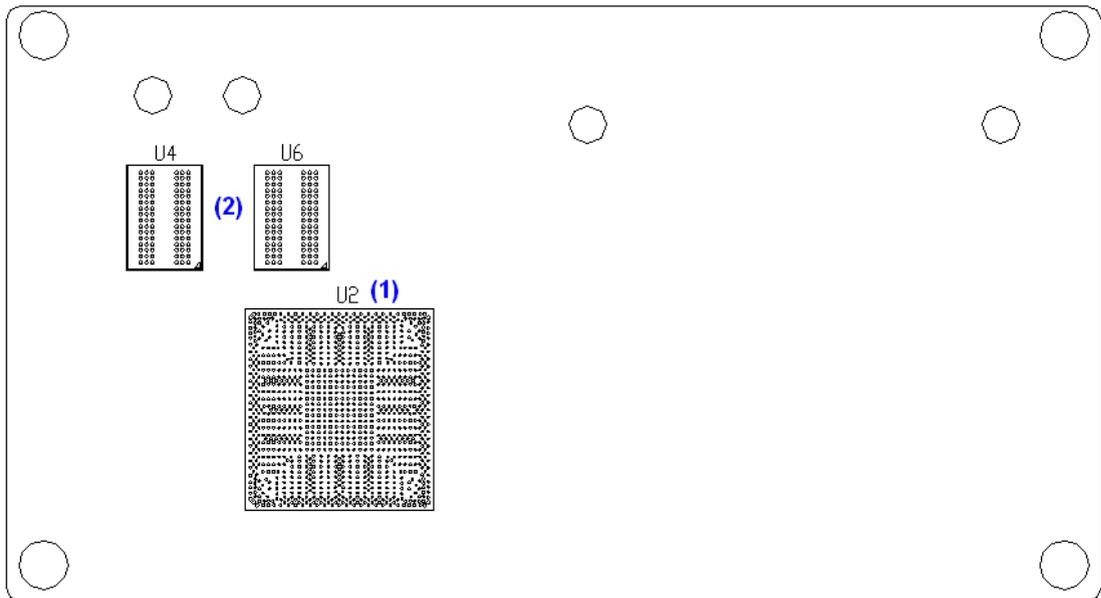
Jumpers and Connectors Location- Board Bottom
